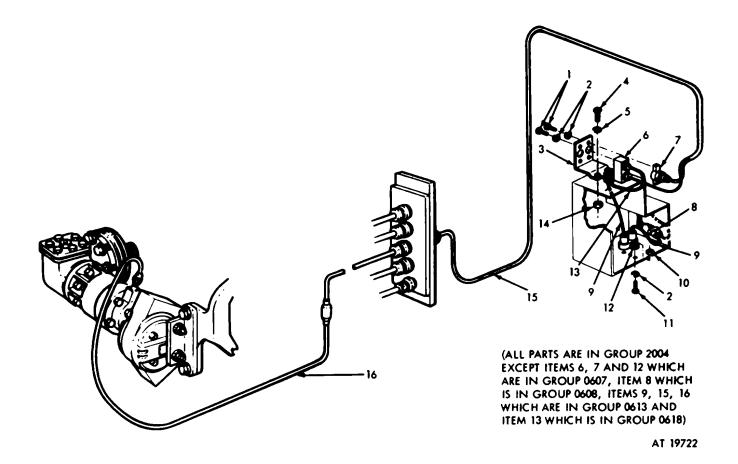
Electro-magnetic clutch electrical system - exploded view.
